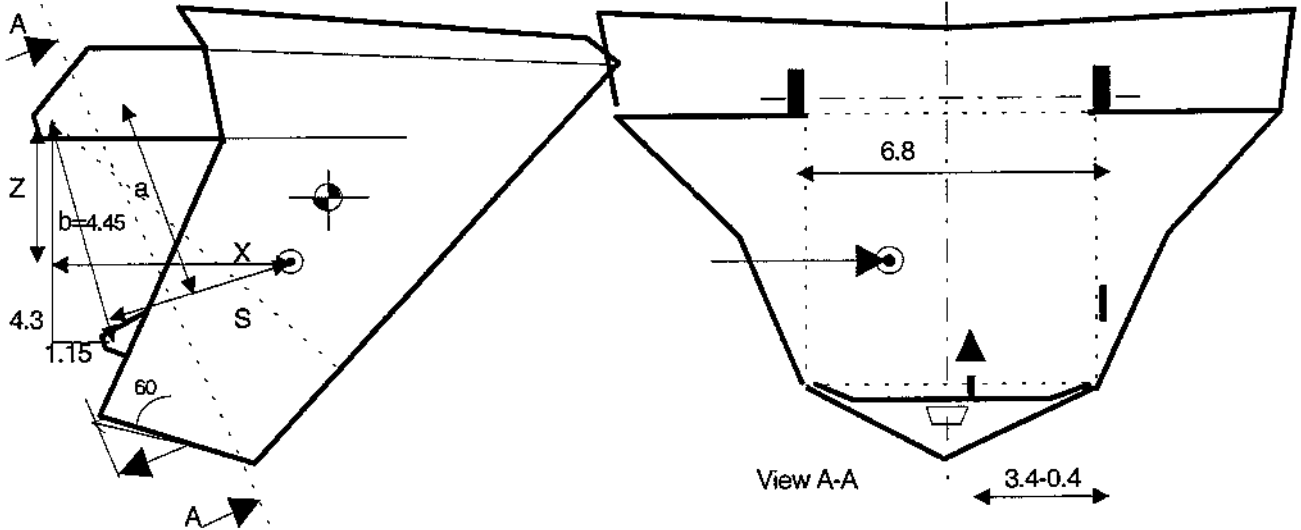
Bottom lock load and visor dimensions in calculation of bottom lock reaction to opening and yawing moments (transverse load component) after p-side lock failure.
